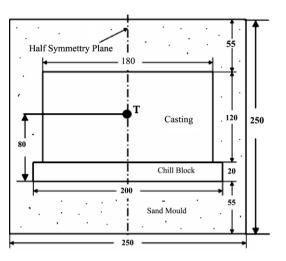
Dimensions of the rectangular casting with chill block indicating thermocouple location, 'T'.
